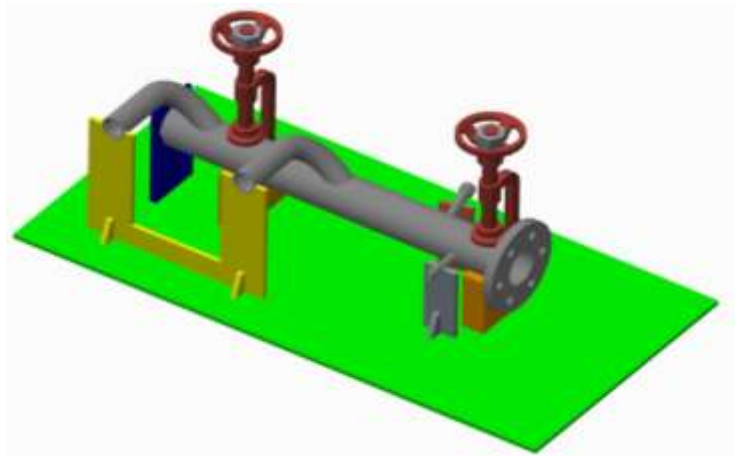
Assembly Design of Inlet Header Welding Fixture
